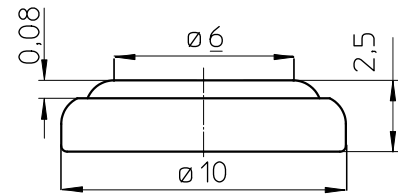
Dimensions of the CR1025 Renata in mm [56].
